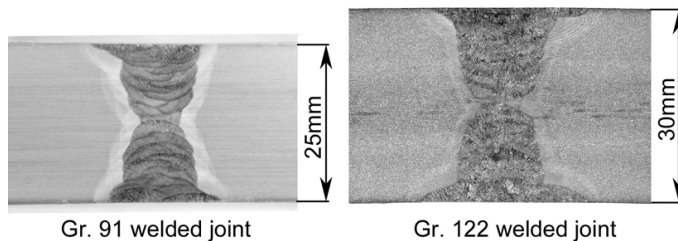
Cross sectional view of the welded joints for the Gr. 91 and Gr. 122 steels.
